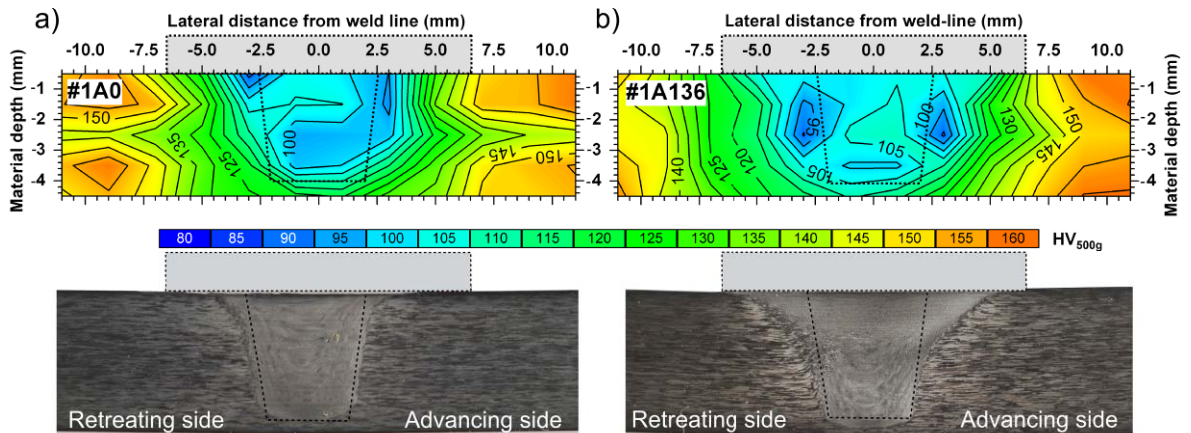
Comparison of 2-D maps of the hardness distribution and the macrostructure for the as-welded test weld #1A0 (a) and the 136 MPa tensioned test weld #1A136 (b). While the upper half of weld #1A136 is much wider, the lower half of both welds appears similar in dimension. The hardness also displays this difference in width, but through the entire plate thickness.
